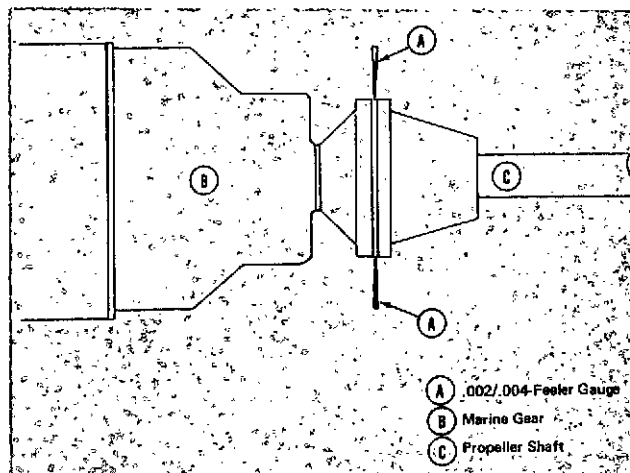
, V11967. Checking alignment between marine gear and propeller shaft
